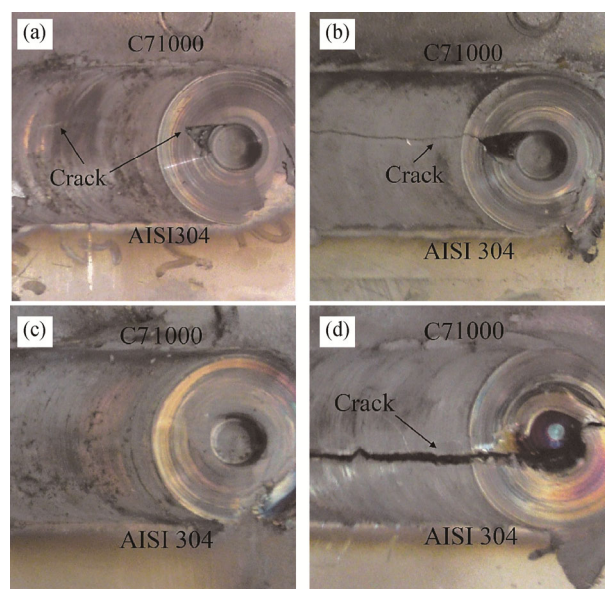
Surface appearance of welded samples: (a) No. 4; (b) No. 1; (c) No. 6; (d) No. 3.
